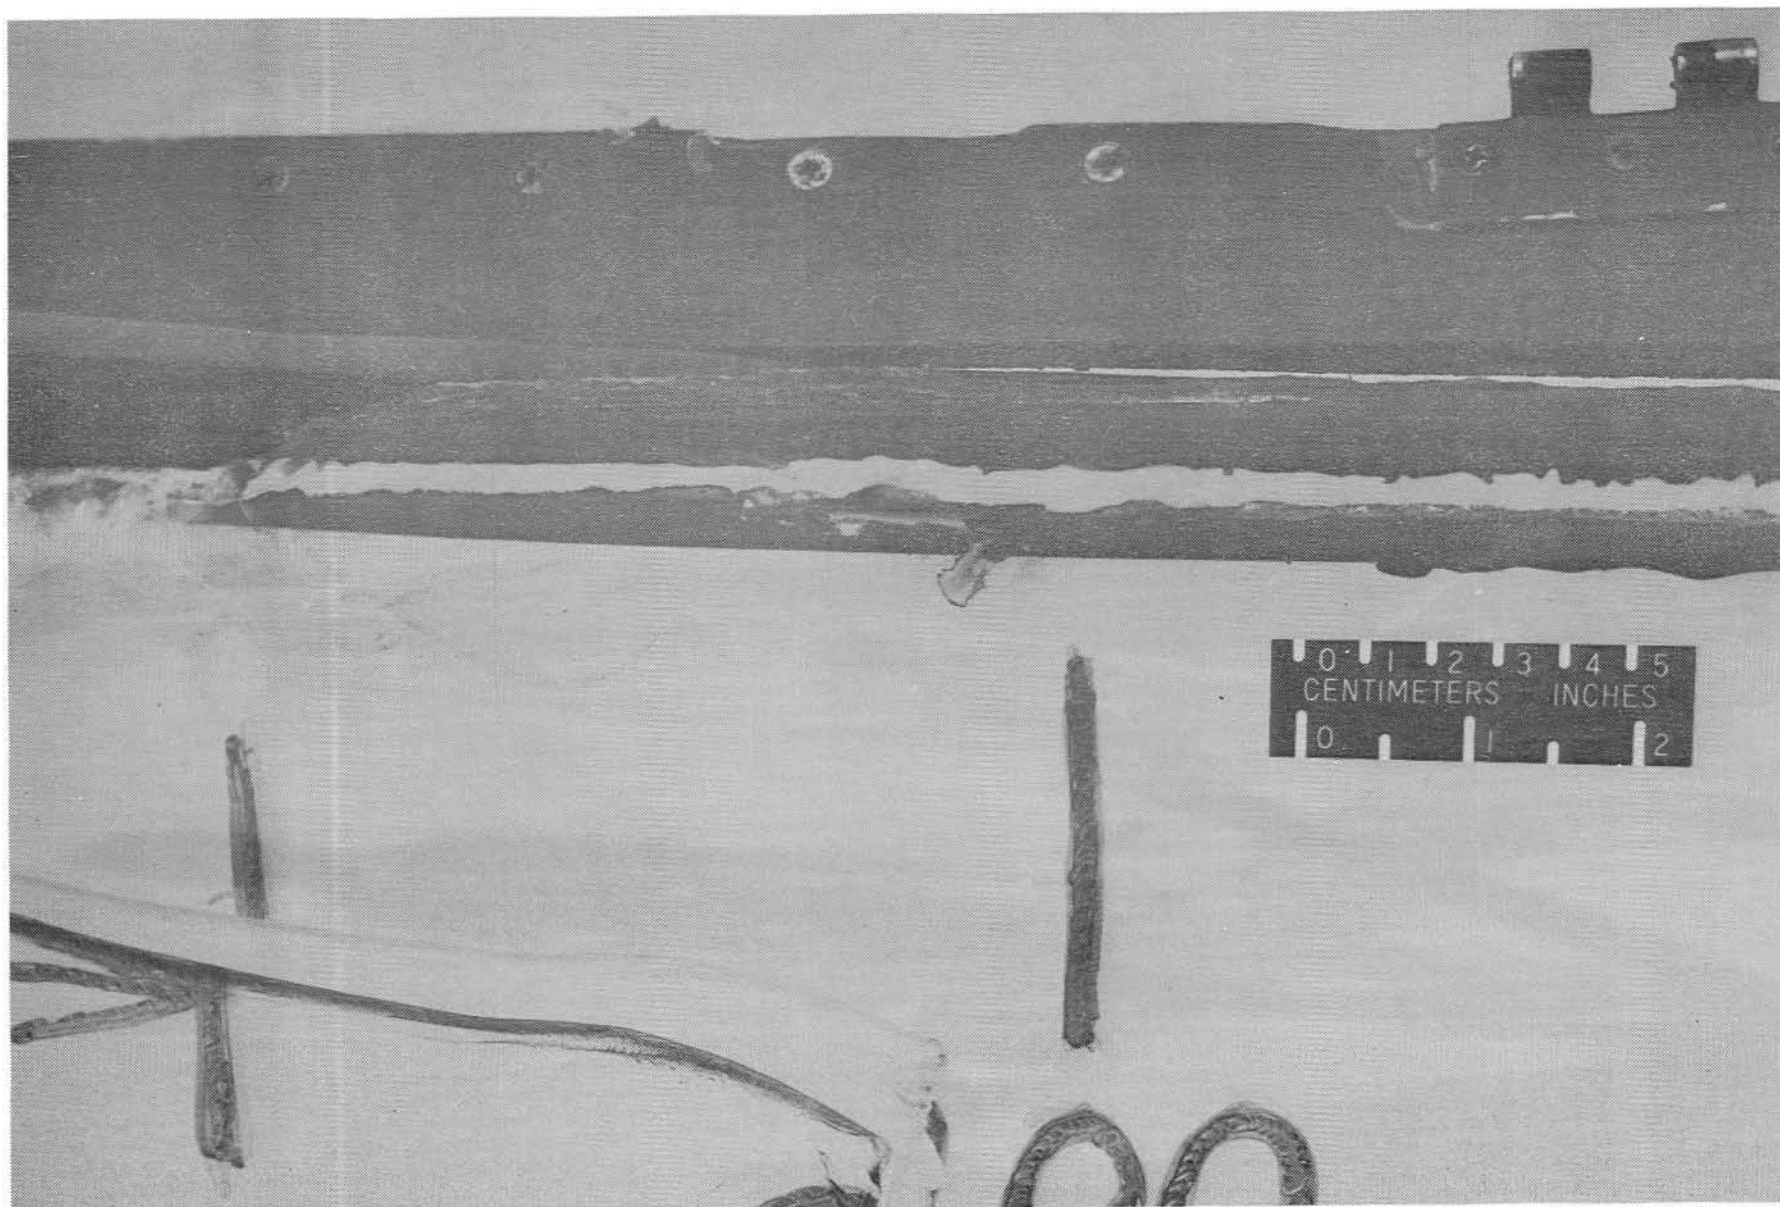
Closeup of upper, center position explosive severance in Test 4, showing fracture of acrylic on explosive centerline on left (no RTV) and at the frame on the right.
